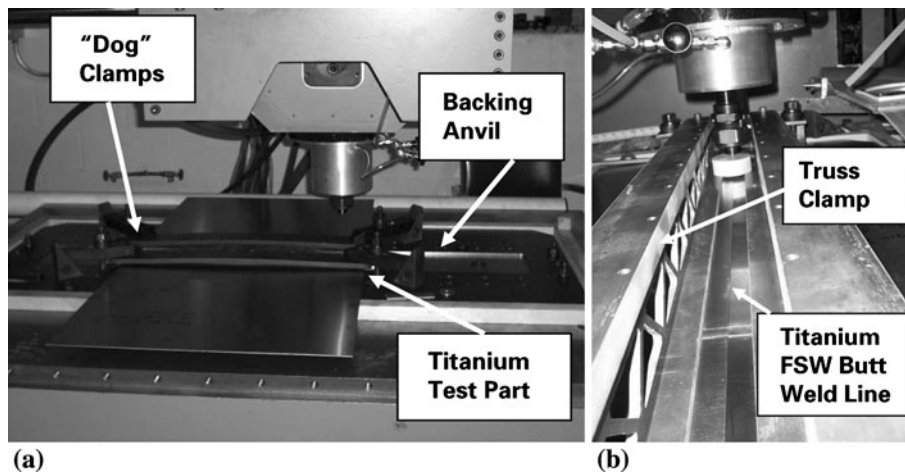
(a) A simple clamping arrangement with insufficient clamping force. (b) A truss style clamping beam apparatus is used to tightly secure two sheets together while making a titanium FSW butt weld
